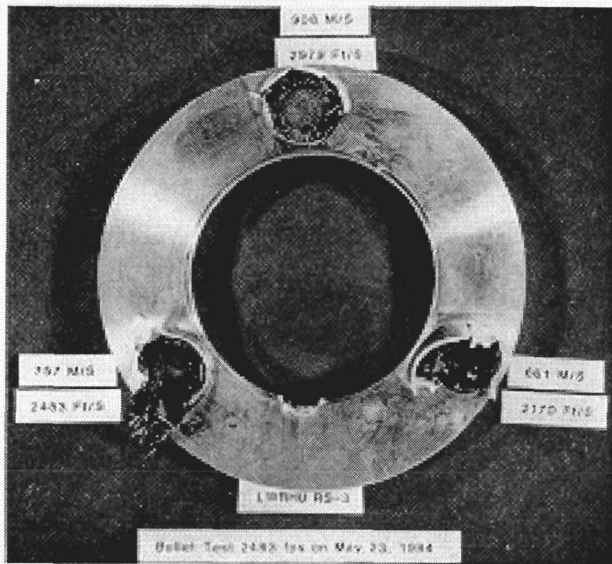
Fixture for holding LWRHU capsules in bullet tests.
